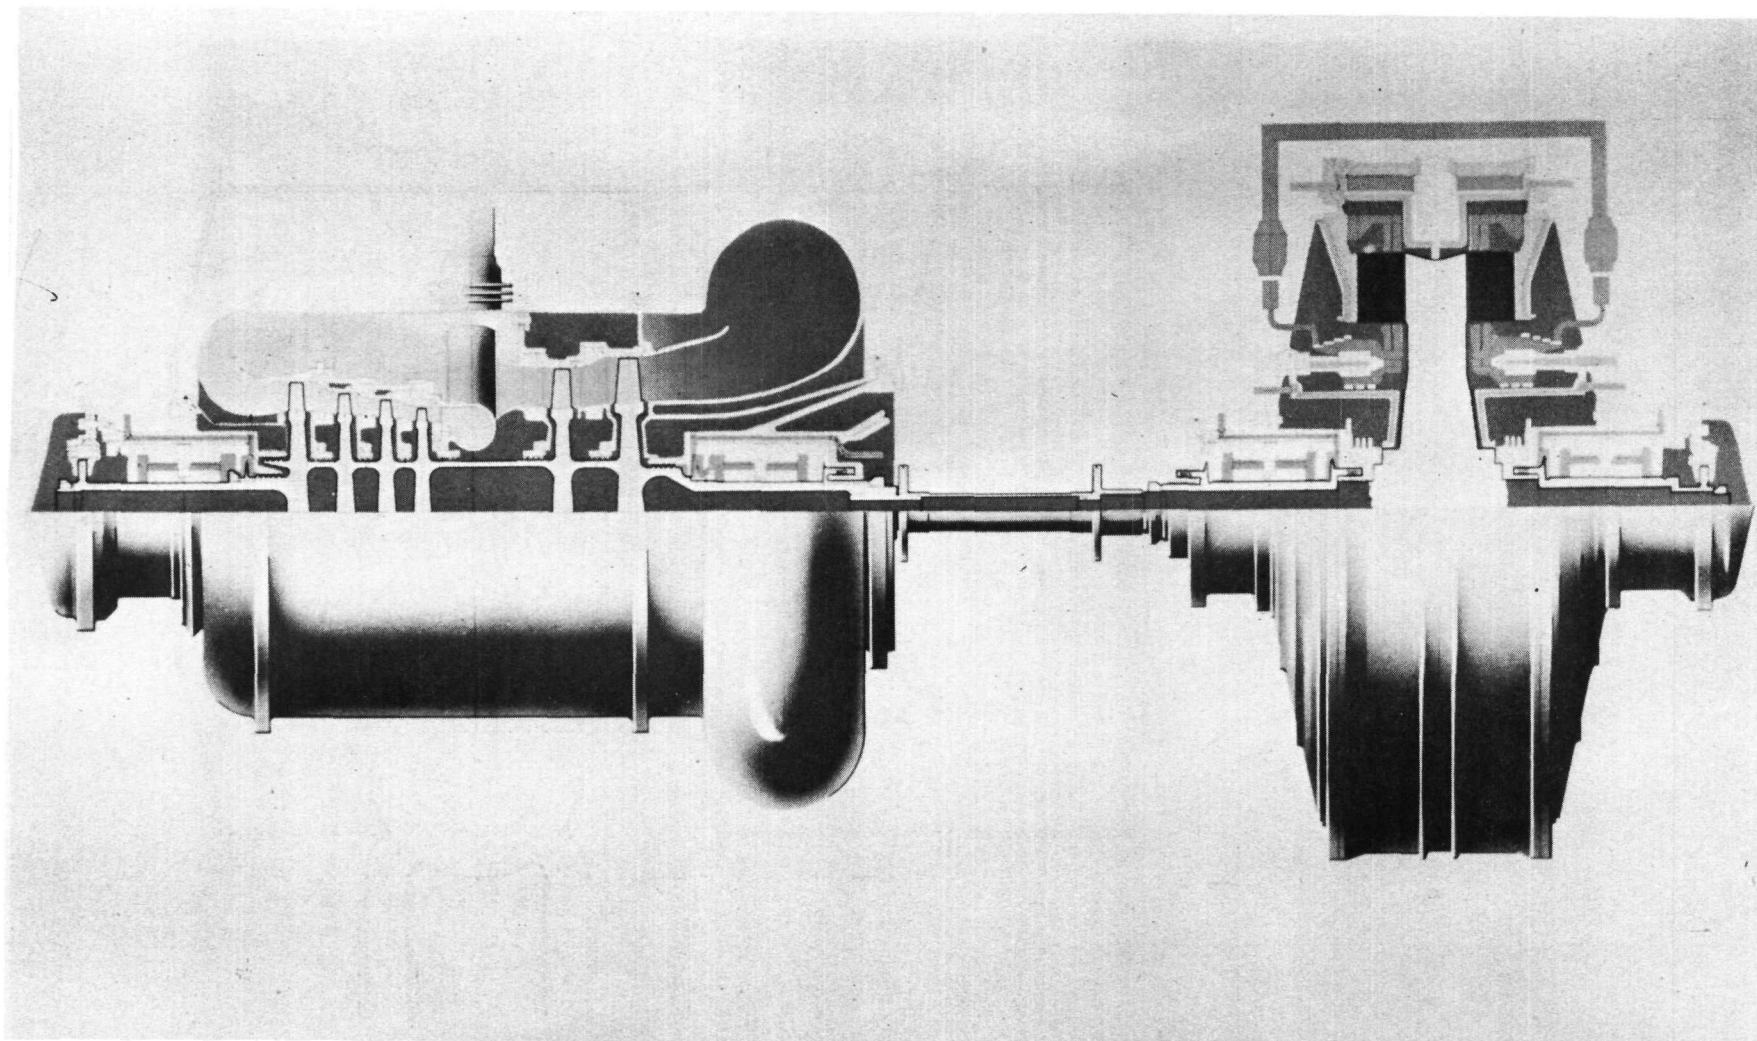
Bearings and Seals in a Potassium Turbogenerator for Space.
